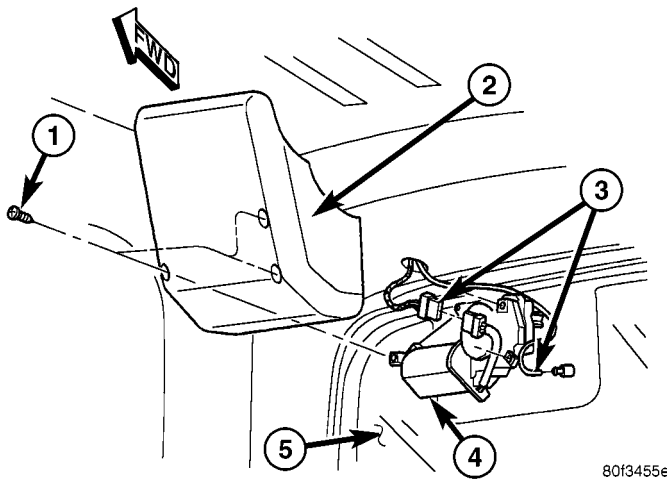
REAR WIPER MOTOR TRIM COVER REMOVE/INSTALL
